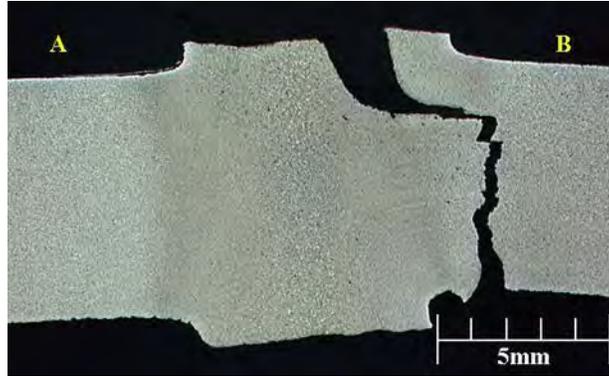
Cross Section of a Flash Welded Seam with a Hook Crack
